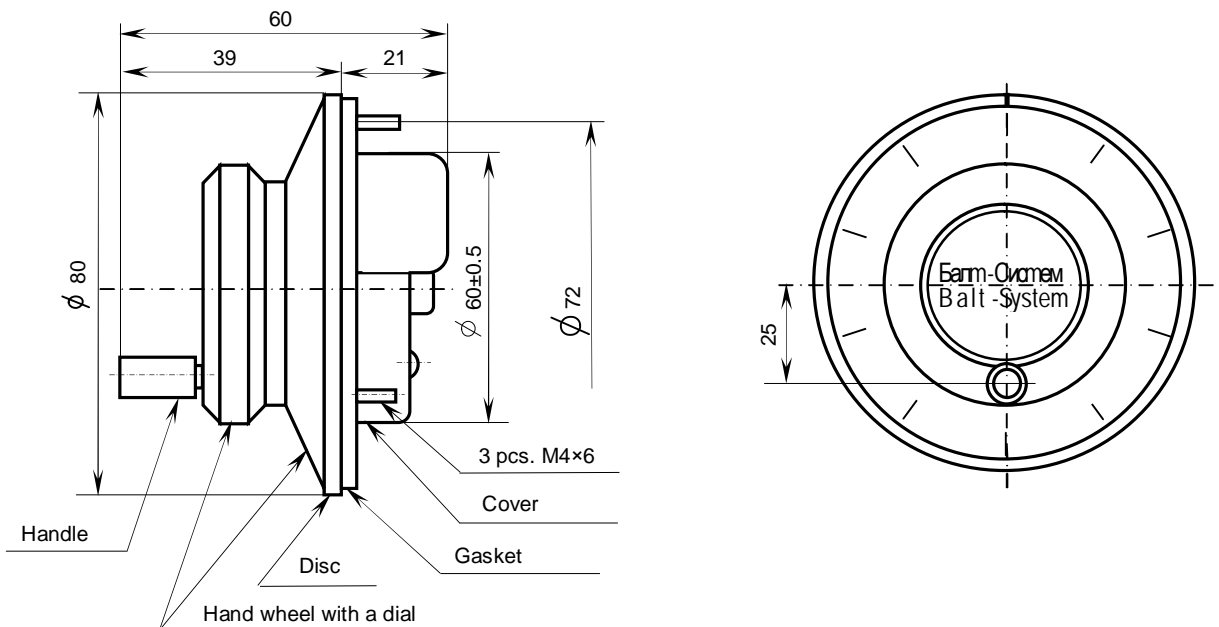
The Overall Dimensions of LGF-12-003B-100 Hand Wheel
